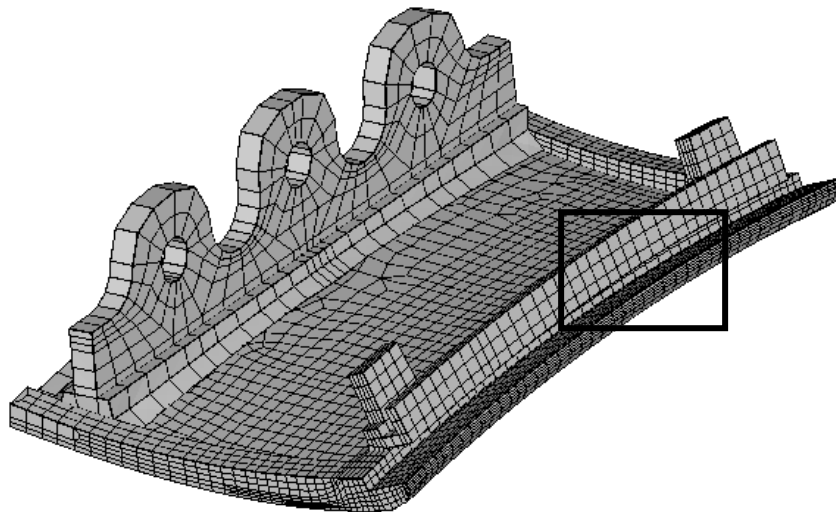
Part from a real-life component of a gas turbine engine with the front edge center framed.
